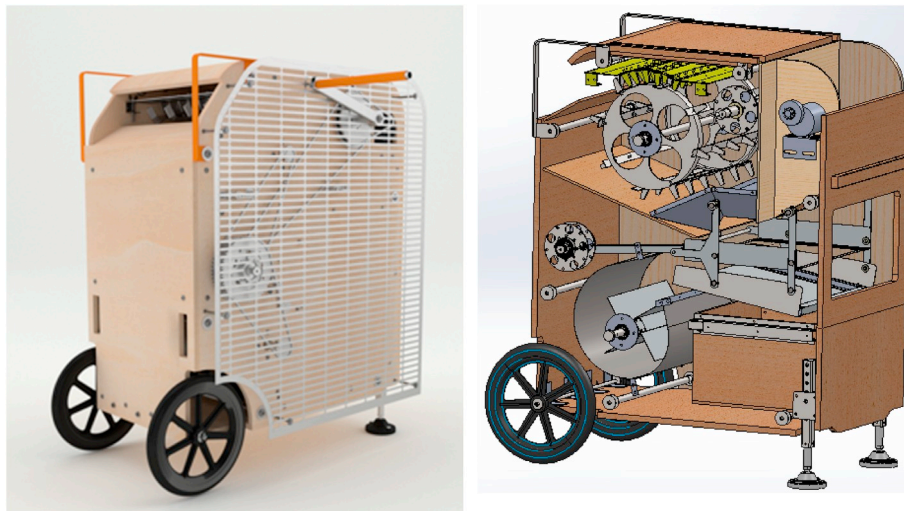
Static threshing-cleaner machine concept (Re-Thresher).
